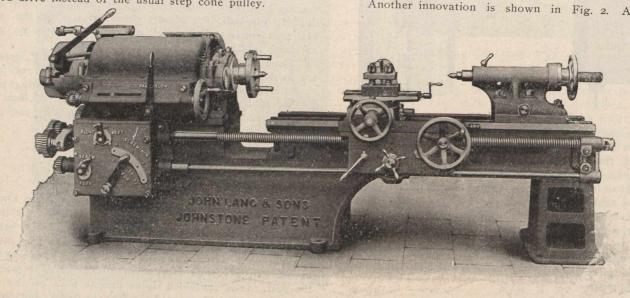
Twenty-inch Swing Triple-Geared Lathe.
